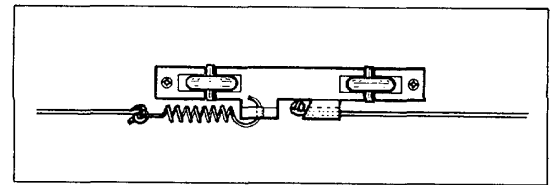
NYLON CABLE (ATTACHMENT TO PEN BLOCK)
